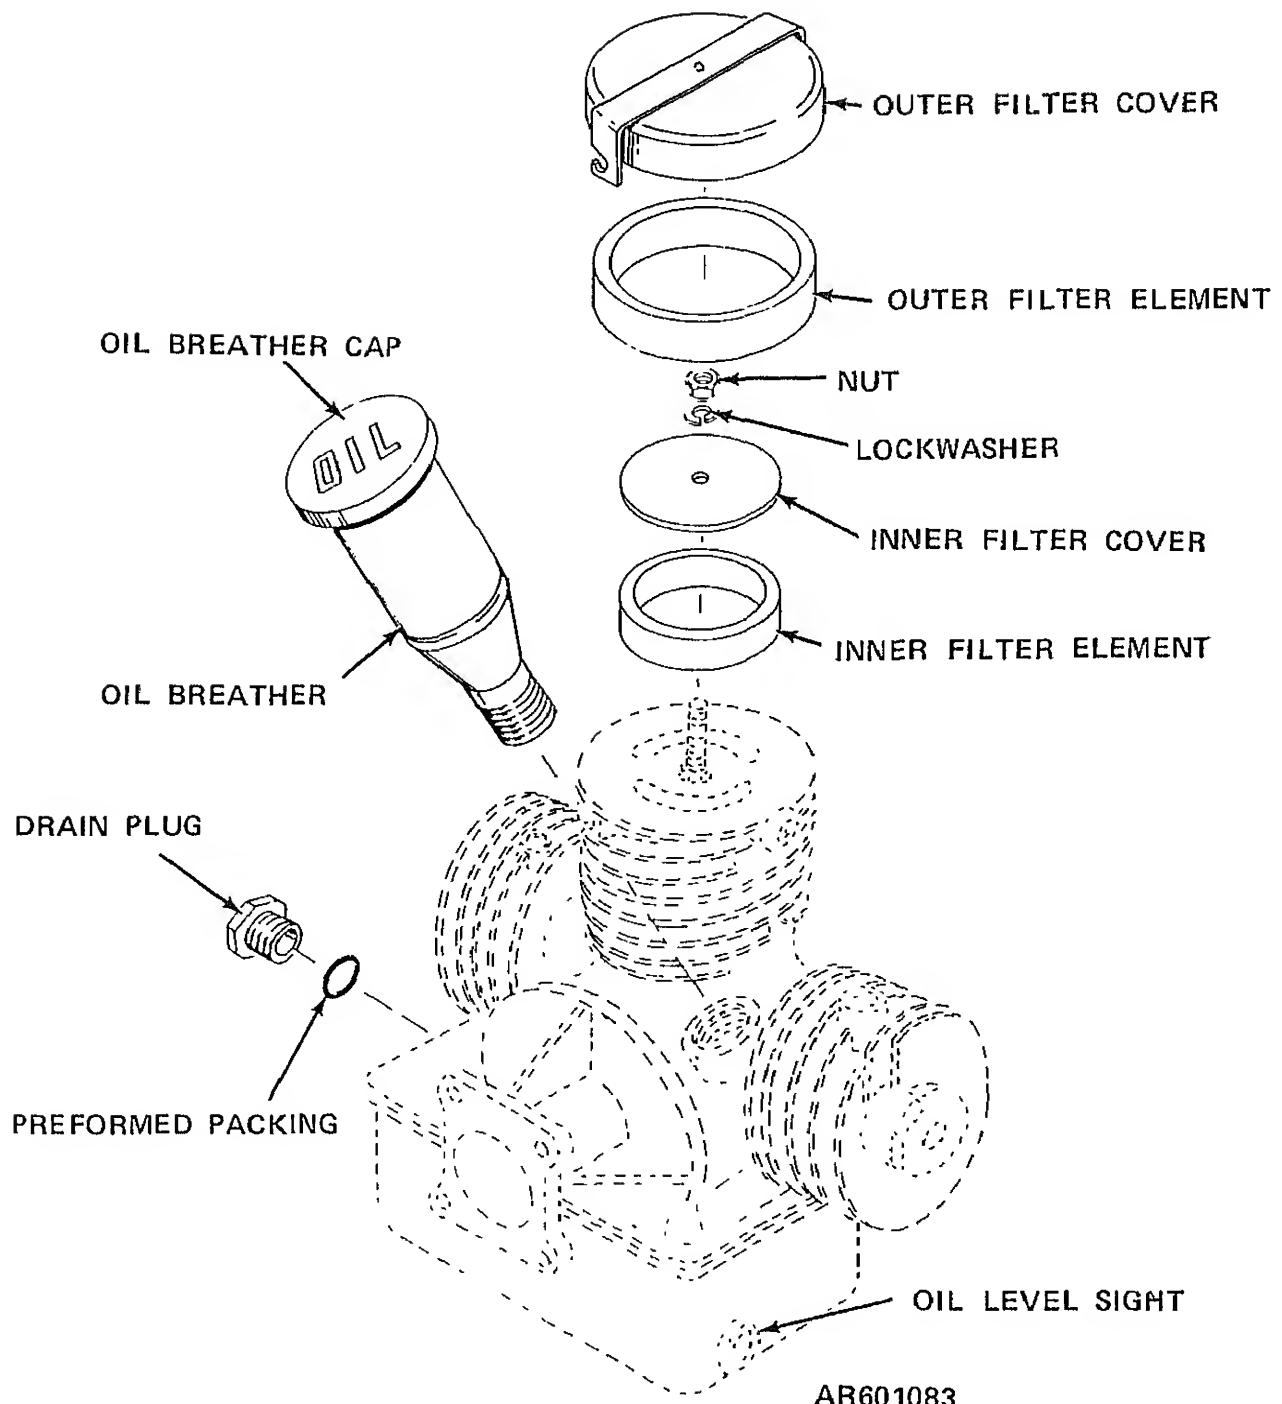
7. Air intake filter, oil breather assembly and drain plug, exploded view. (AN-M4B and
